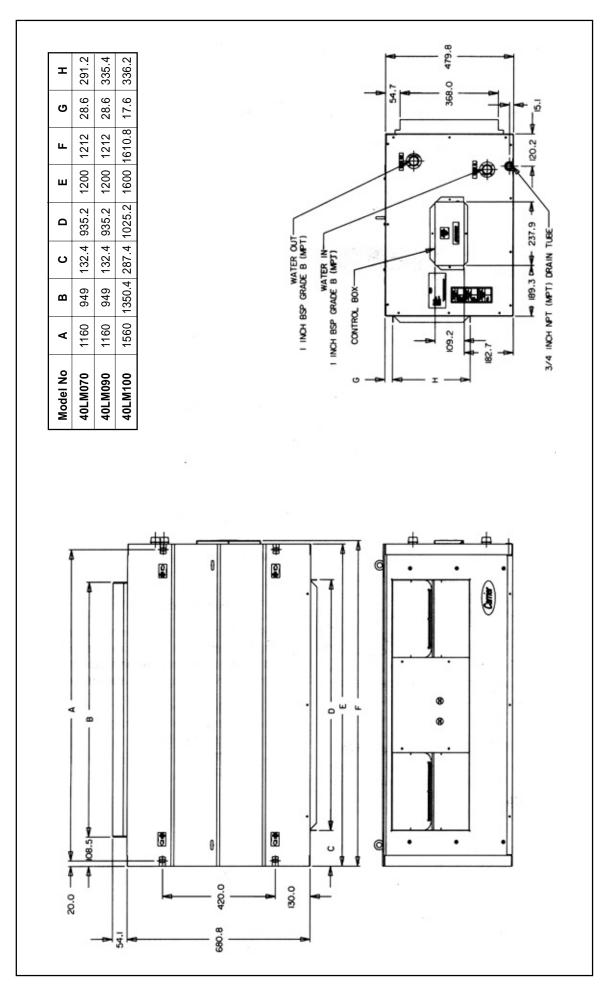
40LM - 070/090/100 DIMENSIONAL DRAWING
